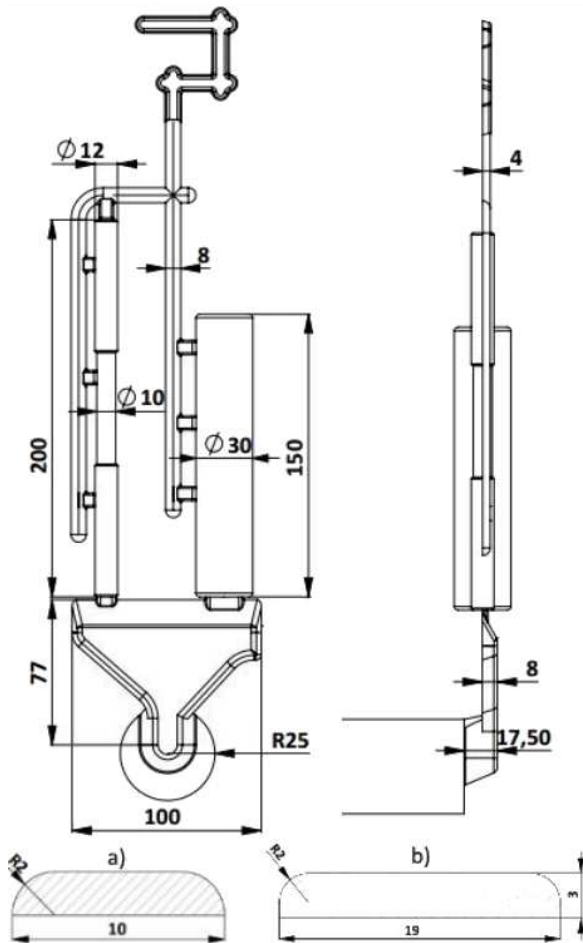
The appearance of the parts, gating and vacuum channels used in experiments.
